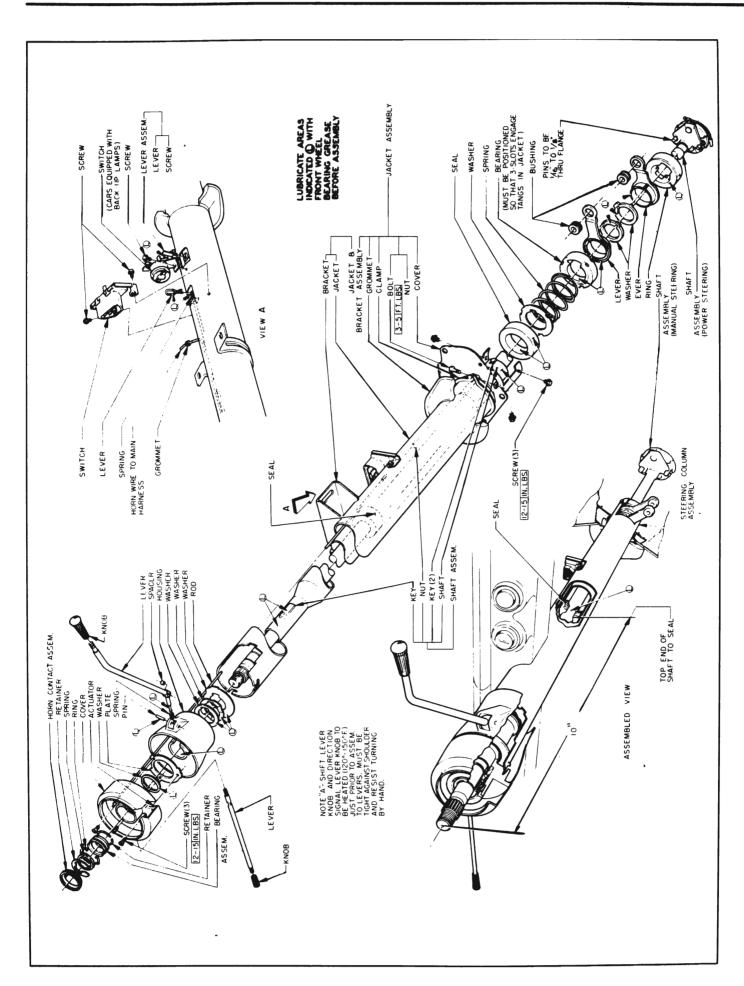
Mast Jacket and Transmission Shaft Assembly - Three+Speed Synchromesh Transmission
